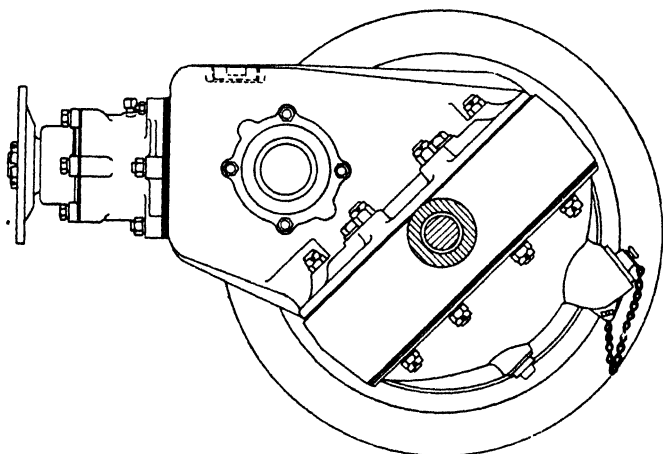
DOUBLE-REDUCTION-AXLE CENTER HOUSING WITH BANJO AT 45 DEG.
